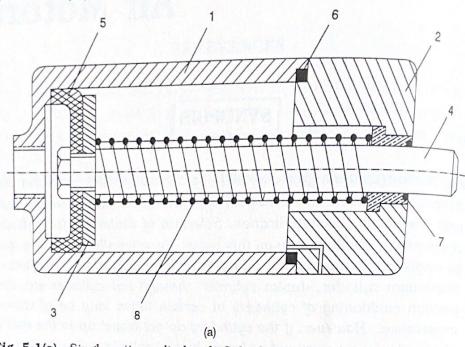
(a) Single acting cylinder: 1. Cylinder body (tube) 2. End cover 3. Piston 4. Piston rod 5. U-cap seal 6. O-ring 7. Bush 8. Spring
